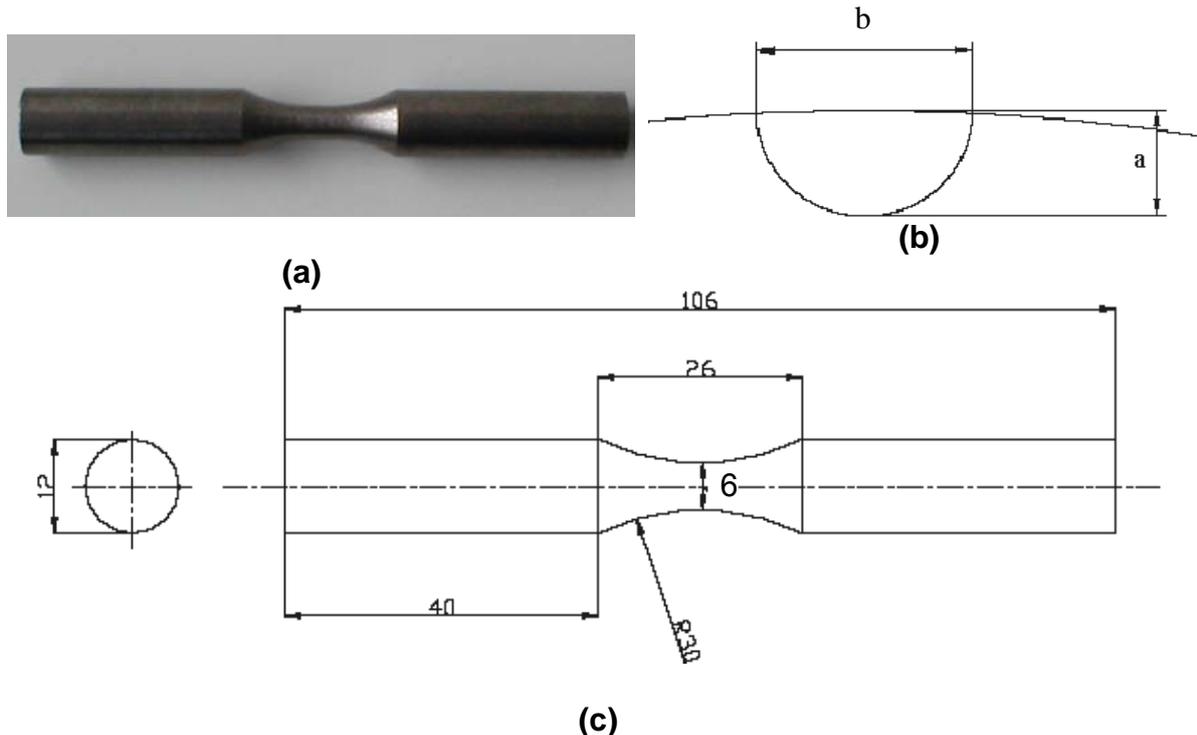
(a) Specimen used for the rotating bending fatigue tests; (b) Particular of the micro-hole ($b/a=2$). (c) Specimen geometry
